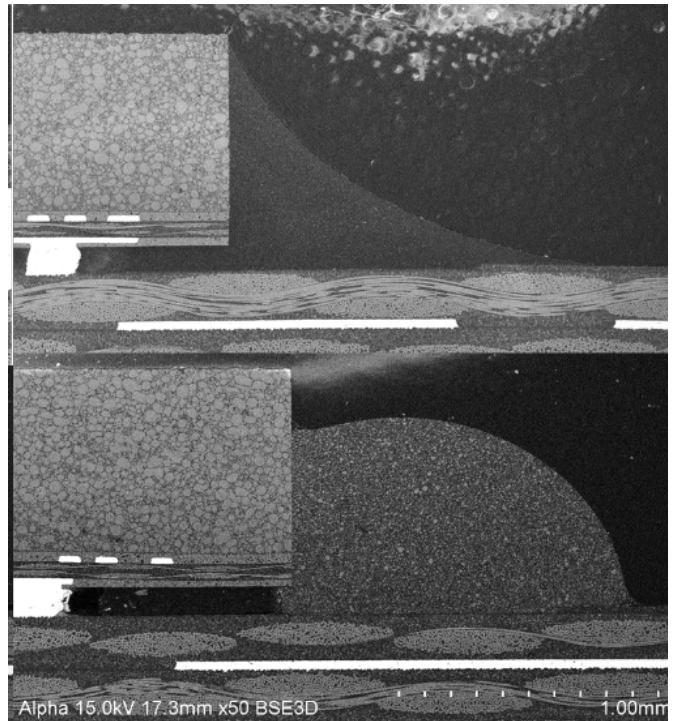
Images of the cross sectioned assemblies with Underfill and Edgebond assemblies.
